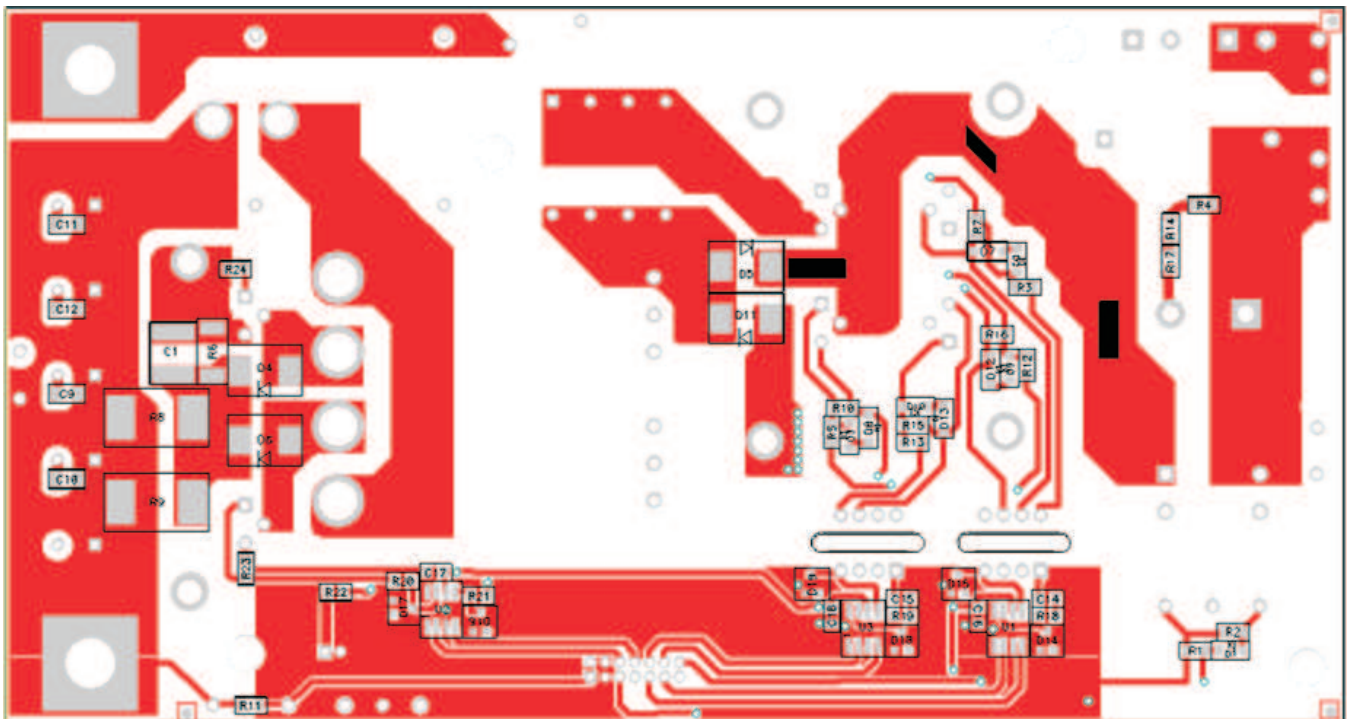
UCC28950EVM-442 Power Stage Bottom Layer Assembly Drawing (bottom view)
